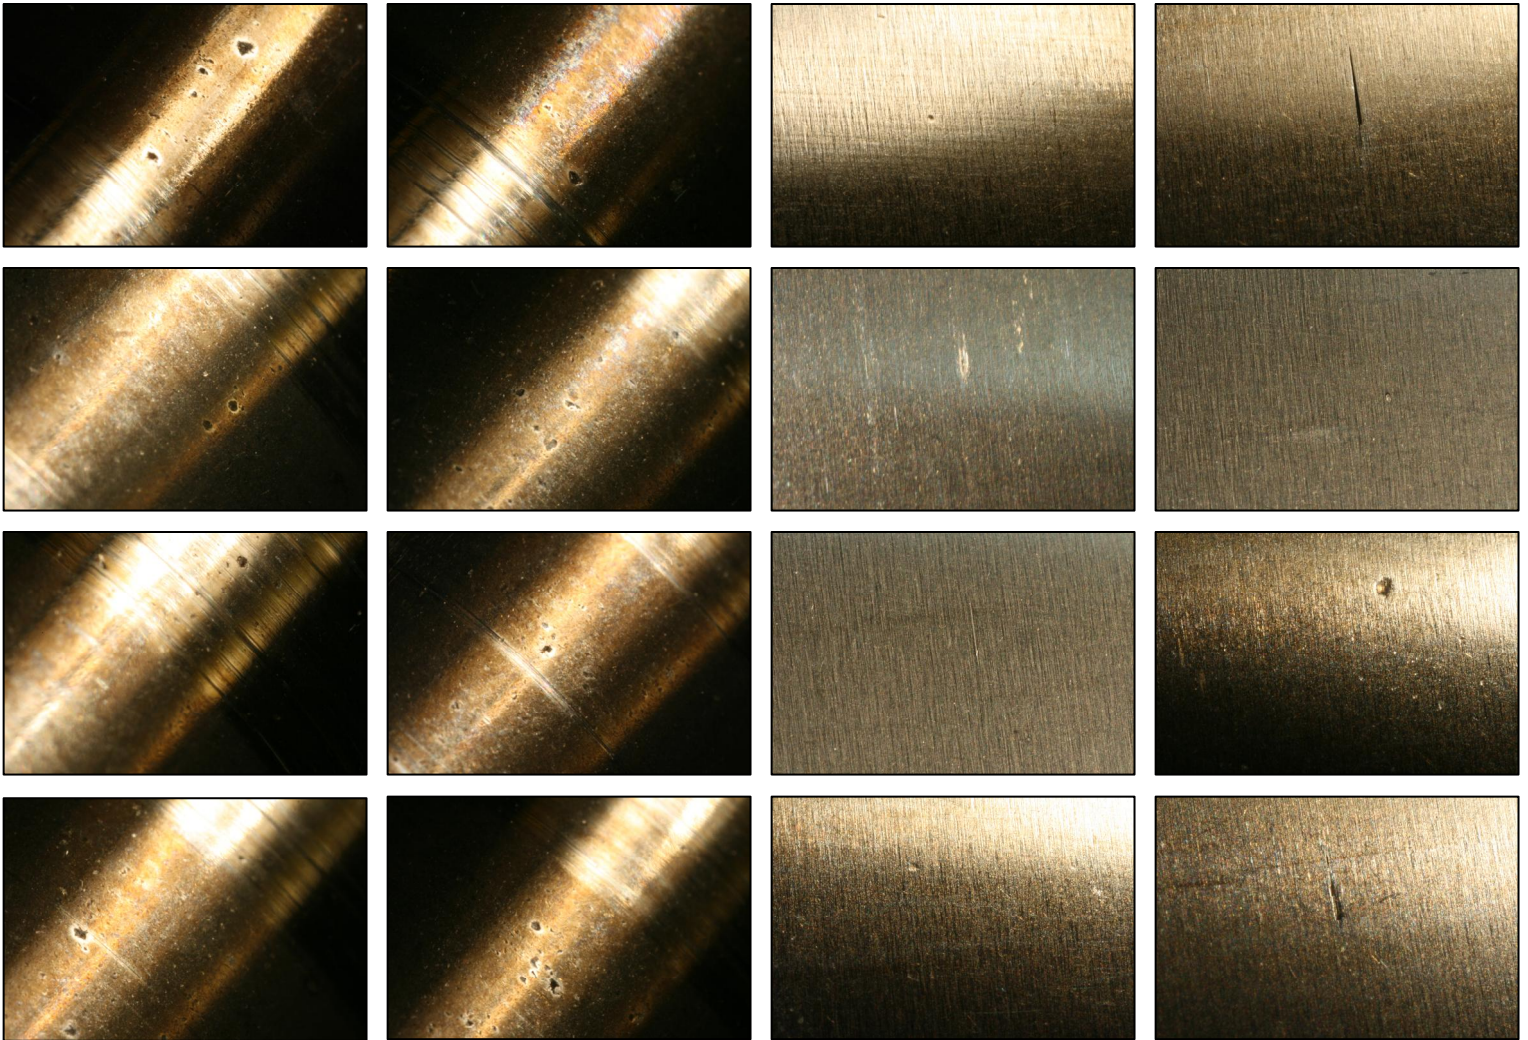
#5 Bearing Rollers and Inner Race from F110-GE-100 Engine
